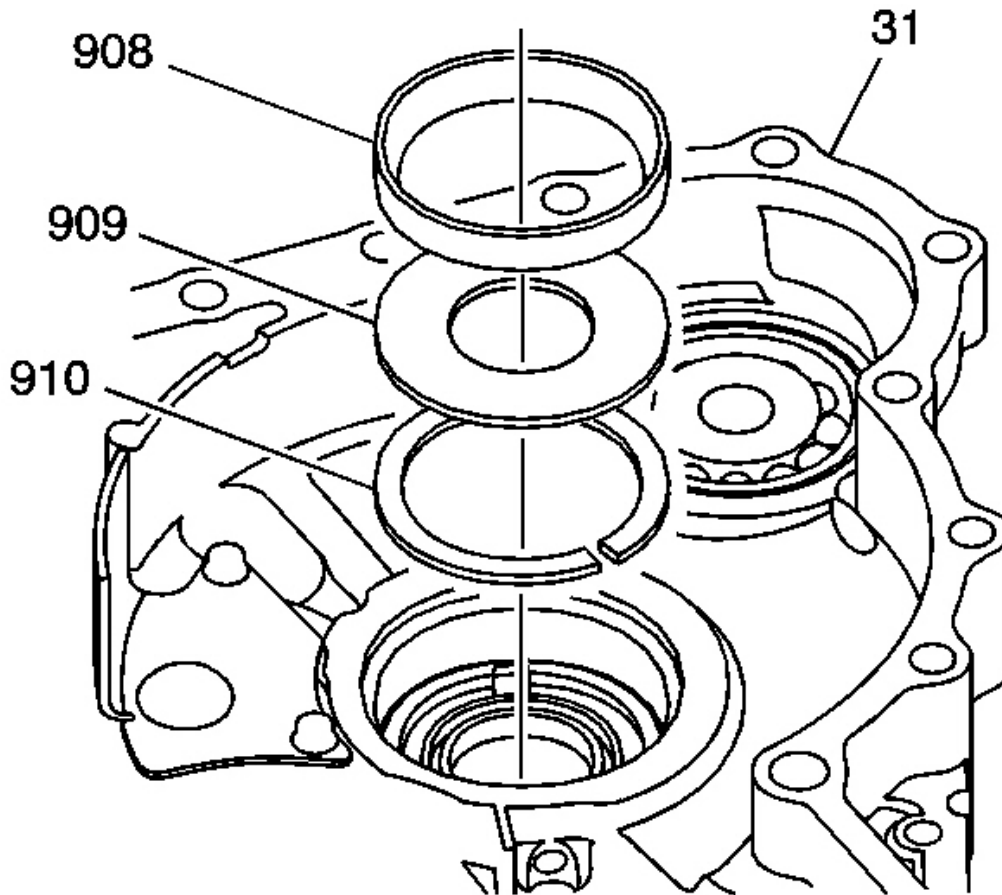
Bearing Race Selective Shim, Spacer & Transmission Case
